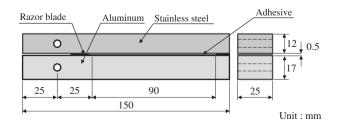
Schematic drawing of an adhesively bonded DCB joint specimen composed of aluminum and stainless steel adherends.
